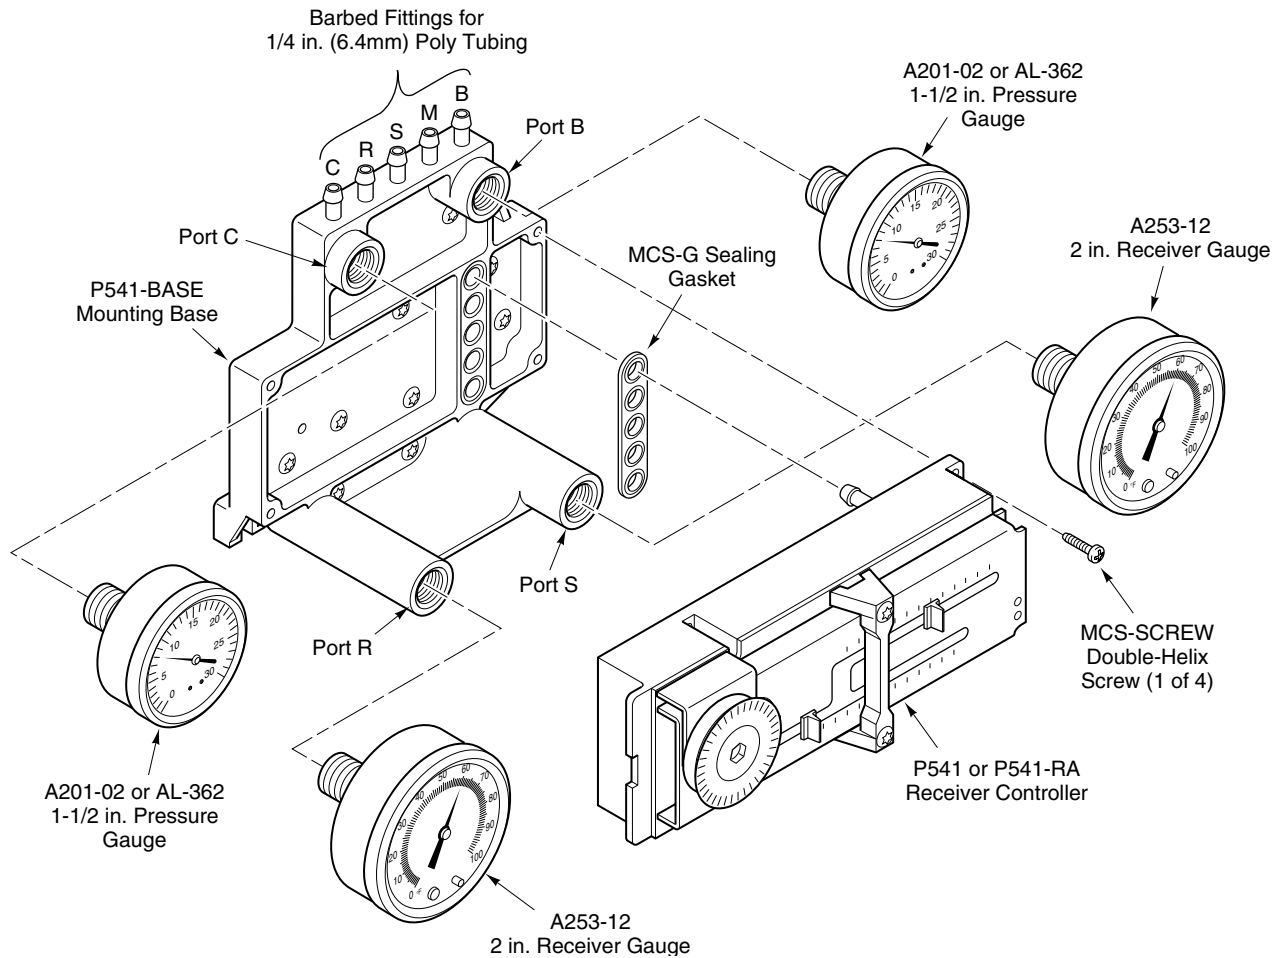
Installation of Receiver-Controller and Gauges on Mounting Base.
